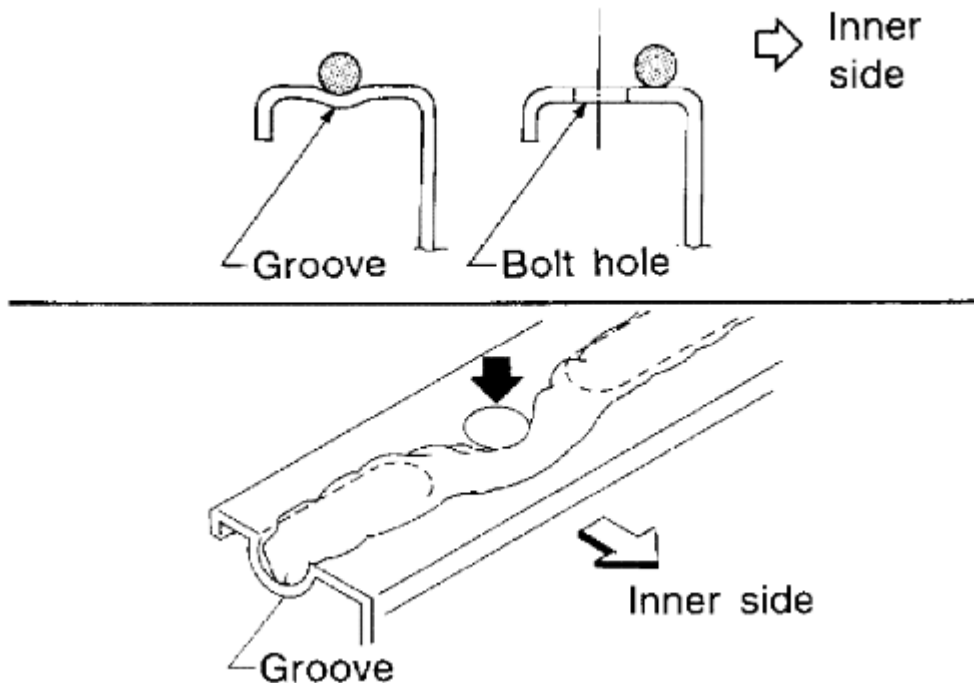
Applying Liquid Gasket Without Breaks To Specified Location
